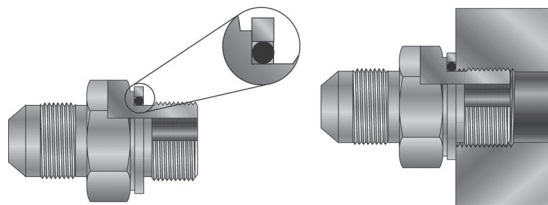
O-Ring with Retaining Ring, Types G & H
